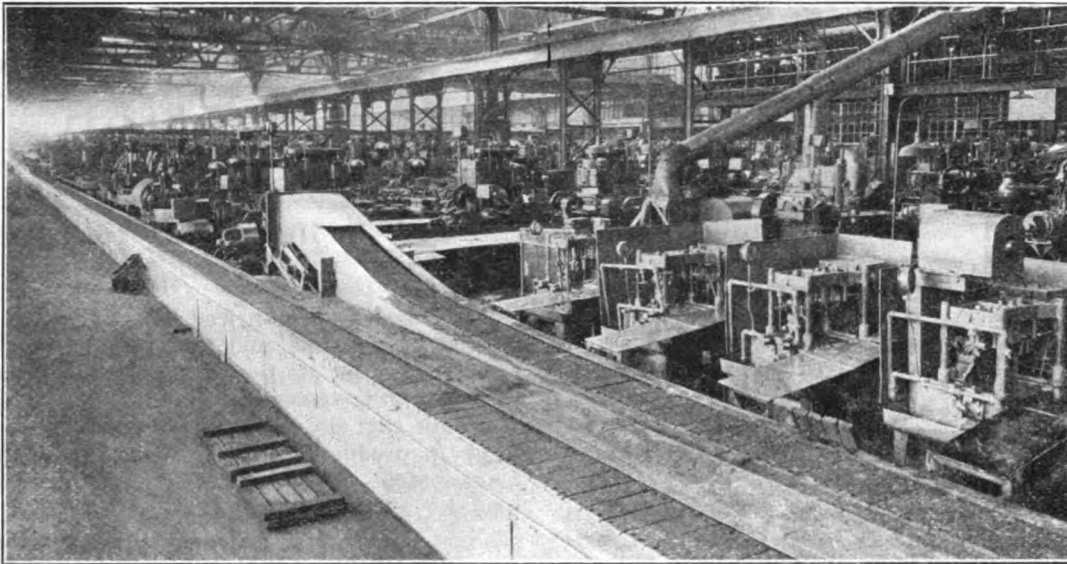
GENERAL VIEW OF THE CYLINDER MACHINE SHOP
